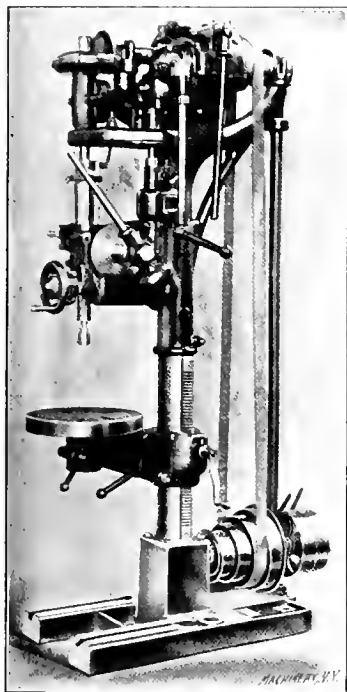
Regular Type Upright Drill built by the Dresdner Bohrmaschinenfabrik.
